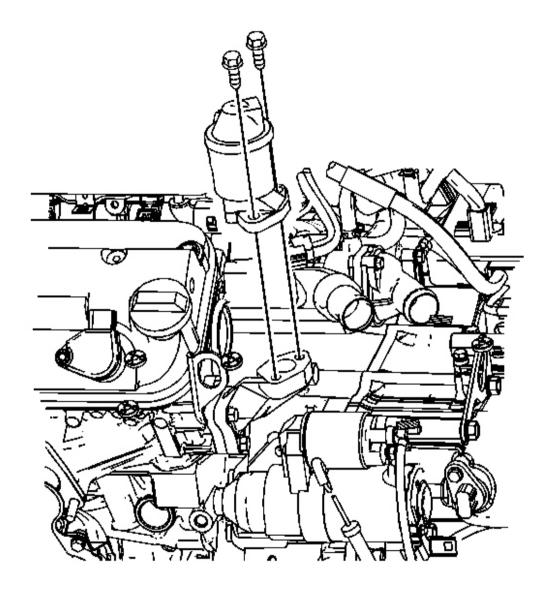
View Of Exhaust Gas Recirculation (EGR) Valve With A New Gasket Courtesy of GENERAL MOTORS CORP.
